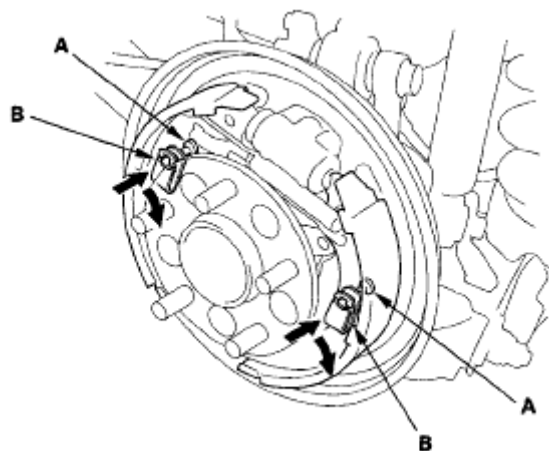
Pushing Respective Retainer Spring And Turning Pin
